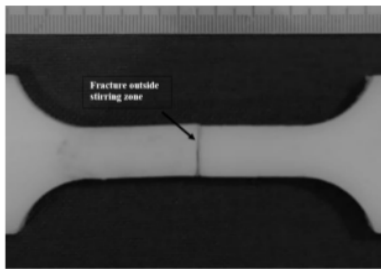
Photomicrograph of fracture surface of PTFE at welding speed 20 mm/minute and tool rotation 1250 rpm
